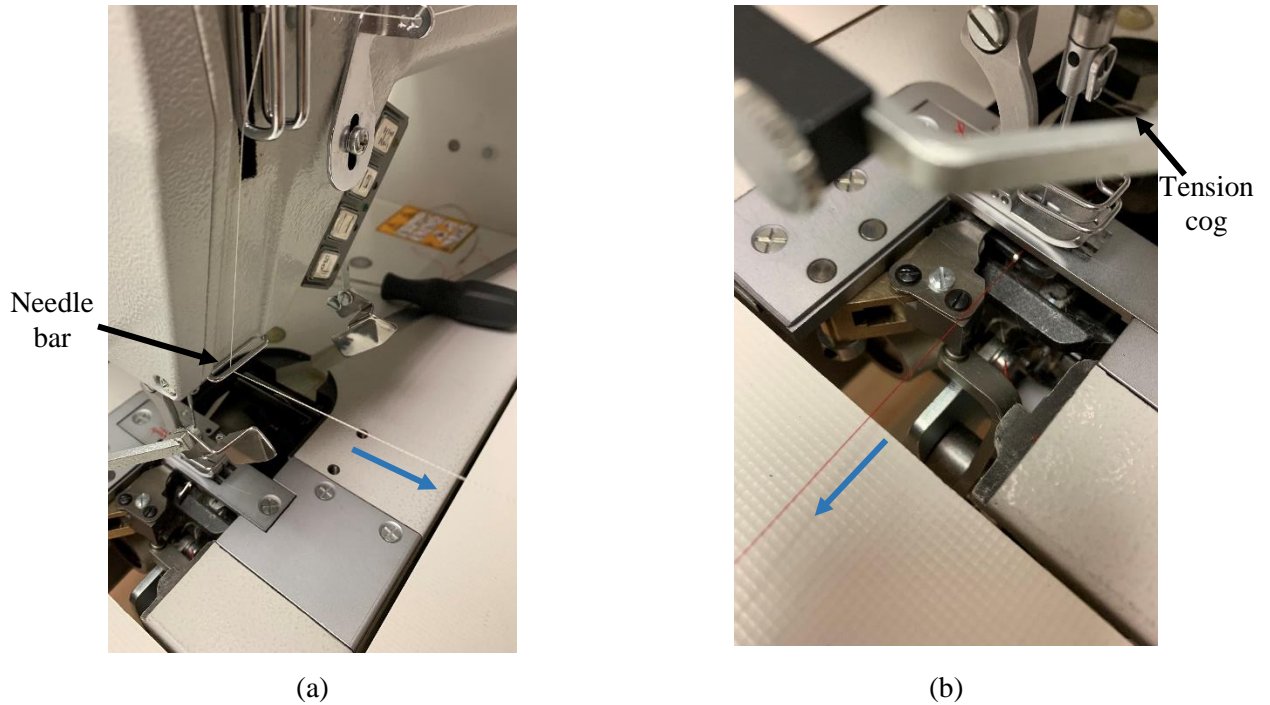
Images of sewing thread positions for measuring thread tension (a) needle thread; (b) looper thread.
